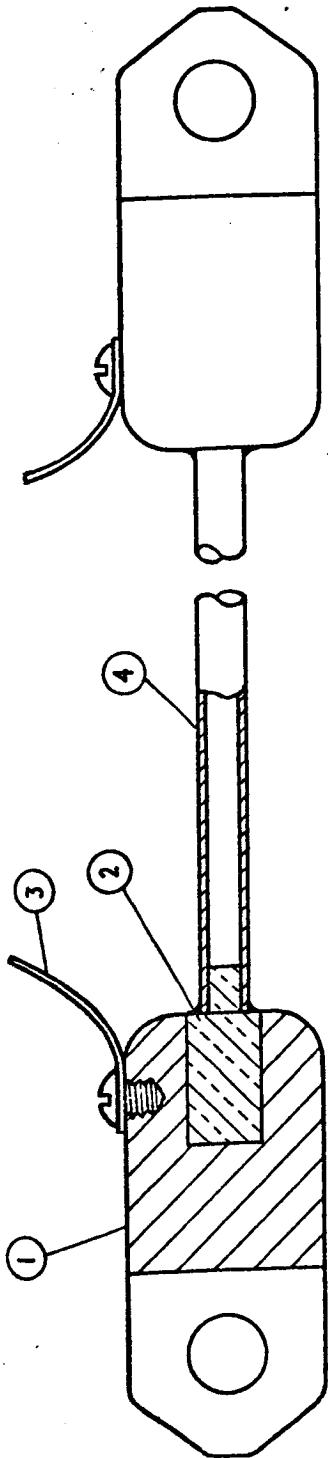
UPPER SURFACE AND INNER ASSEMBLY
